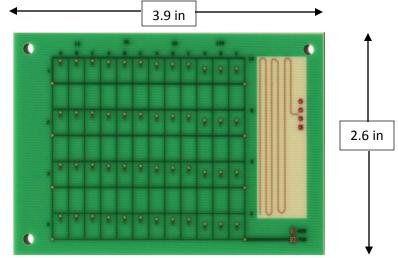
Pitting/Crevice Corrosion Test Board
